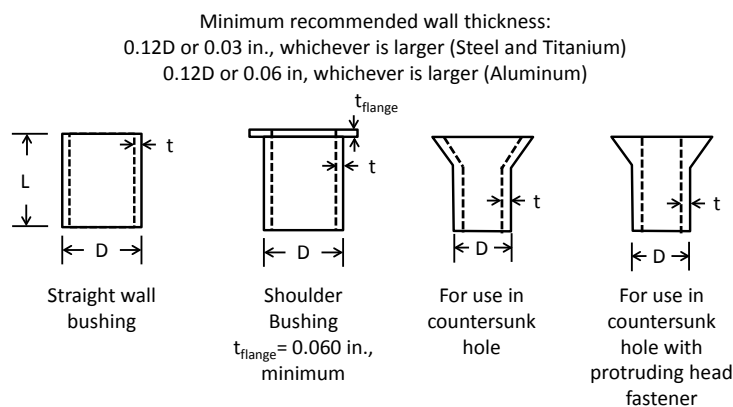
Typical Bushing Types used in Joint Repairs
